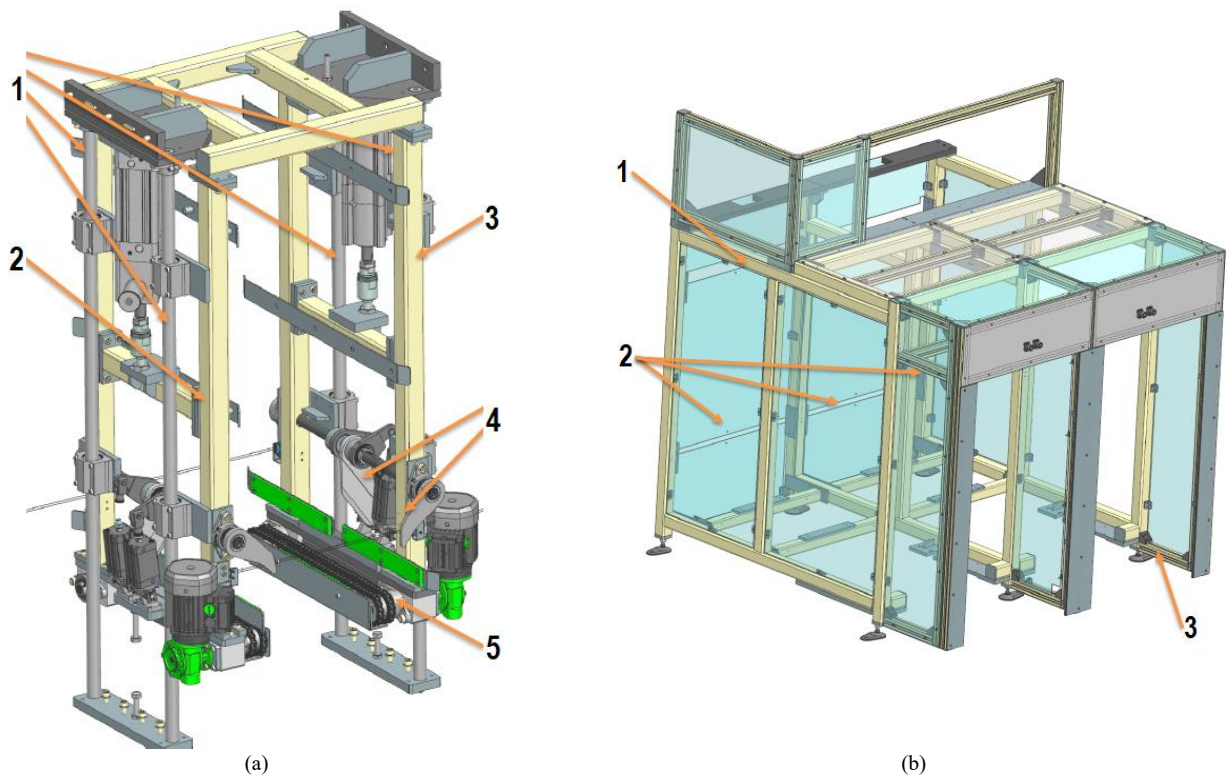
The removal mechanism (a): 1 – linear guides, 2 – frame, 3 – pneumatic cylinder, 4 – separation mechanism, 5 – chain conveyor; and the frame structure of the designed feeder (b): 1 – frame, 2 – mechanical covers, 3 – front frame.
